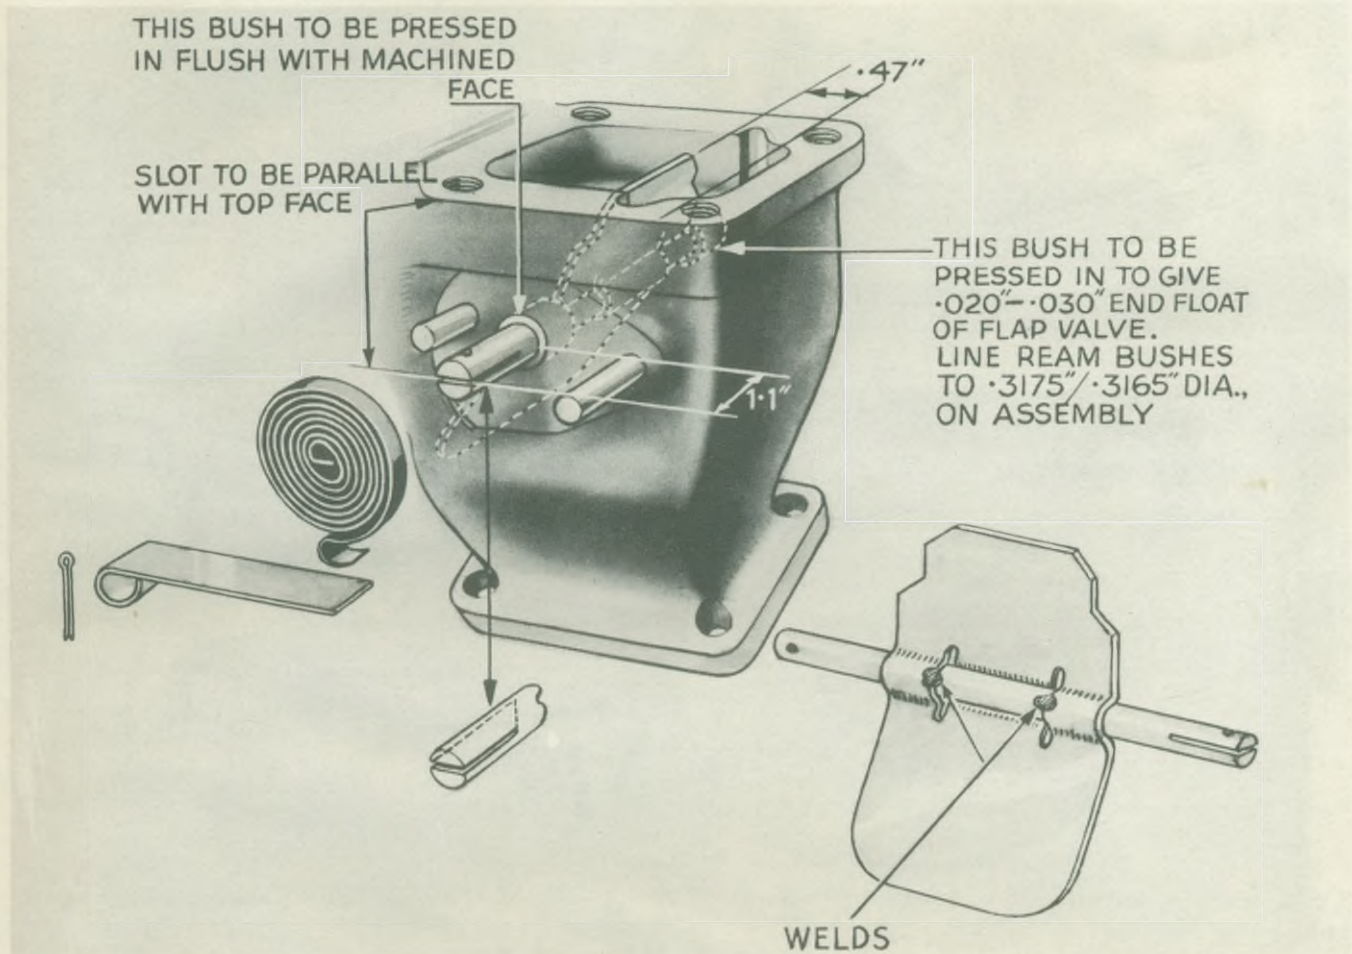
Giving details for the fitting of new bushes and flap valve spindle.
